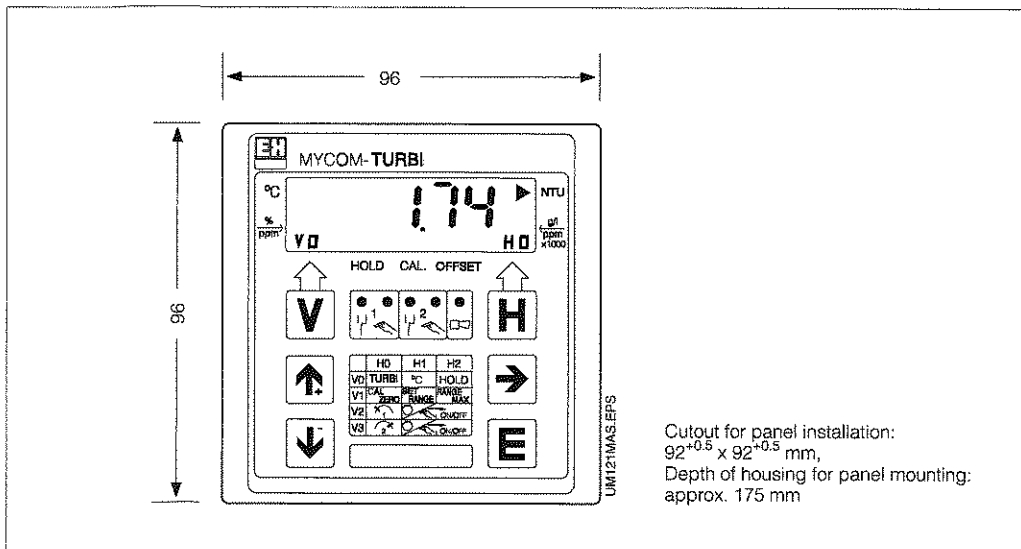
Mycom CUM 121 Dimensions of housing for panel mounting
